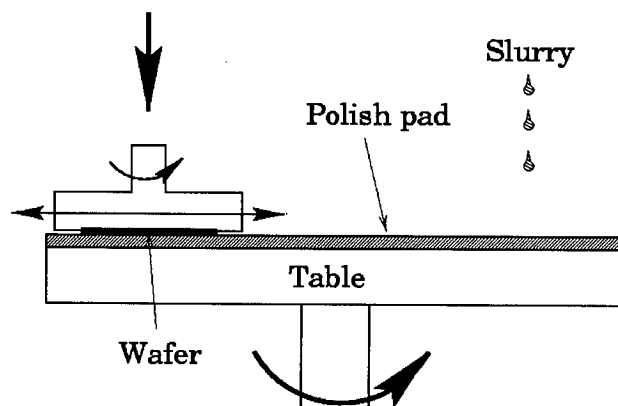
Key tooling elements of CMP equipment, where the table rotates as indicated.
